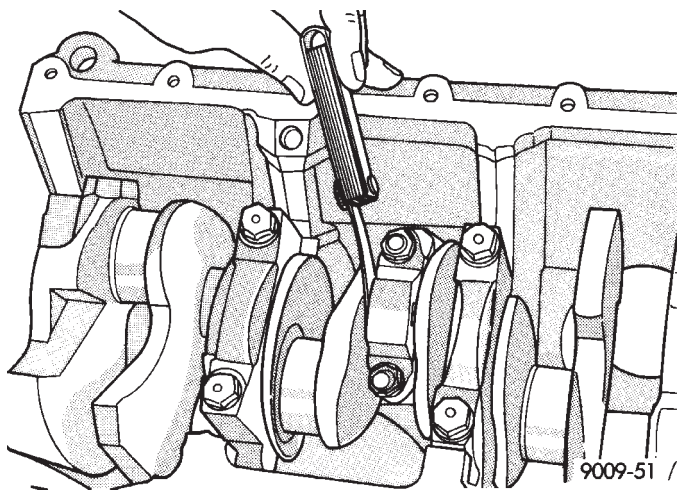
Checking Connecting Rod Side Clearance - Typical
